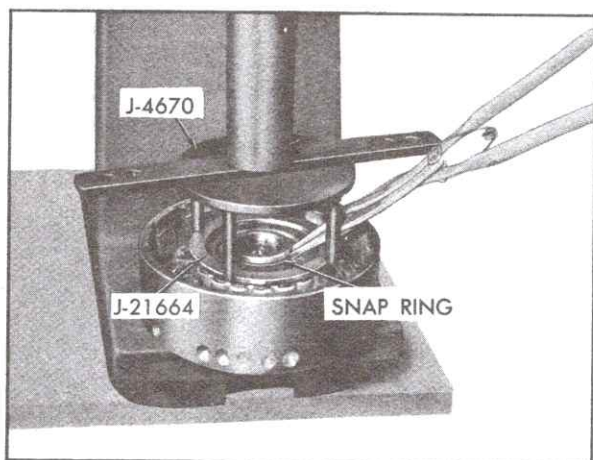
Removing and Installing Forward Clutch Housing Snap Ring
